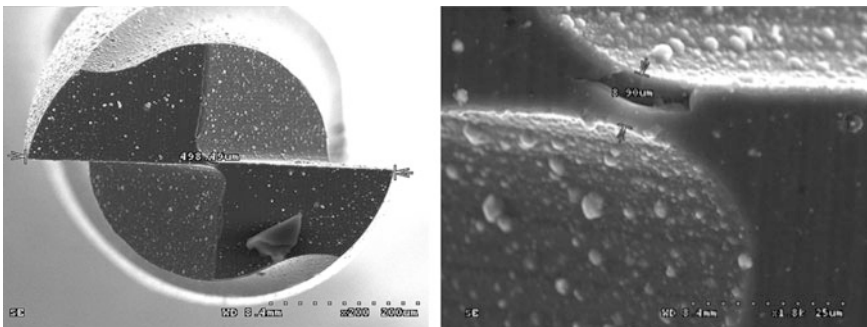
Importance of tool inspection prior to processing. The above illustrates a defect in the tool web
